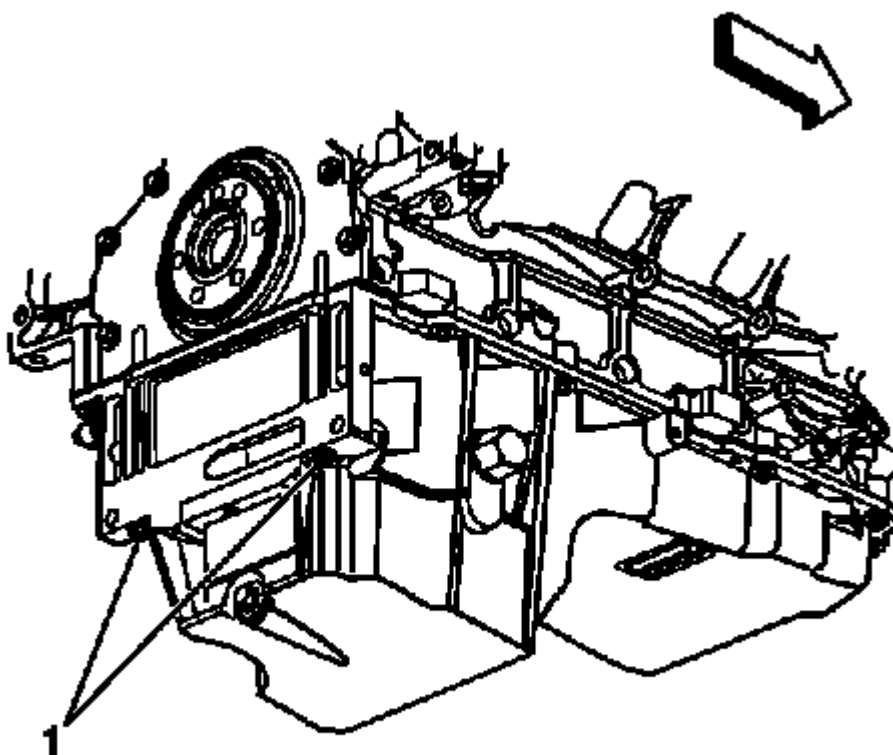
View Of Oil Pan-To-Rear Cover Bolts
